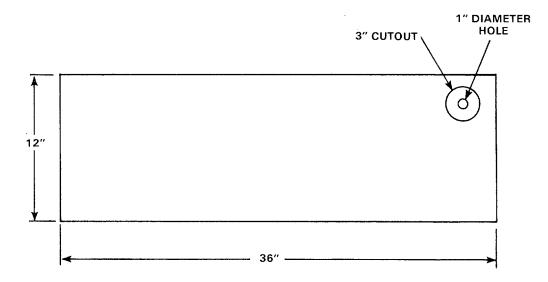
Plug, Insulation for Heater Block Bowl Assembly
